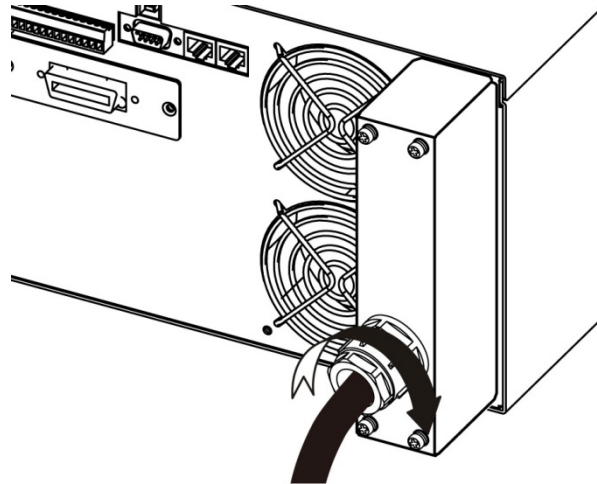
Assembling 62050P Input Terminal Safety Cover - 4
